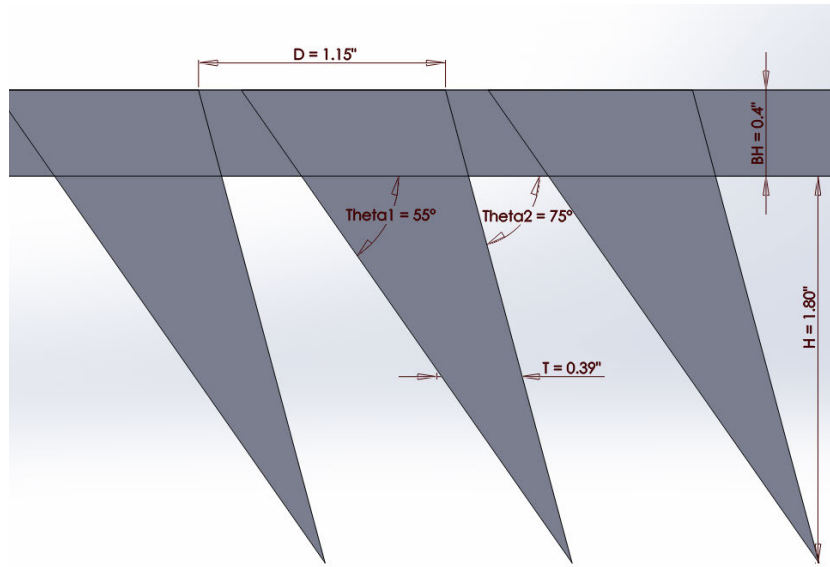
Side view of the Calibration Target with Dimensions Labeled
